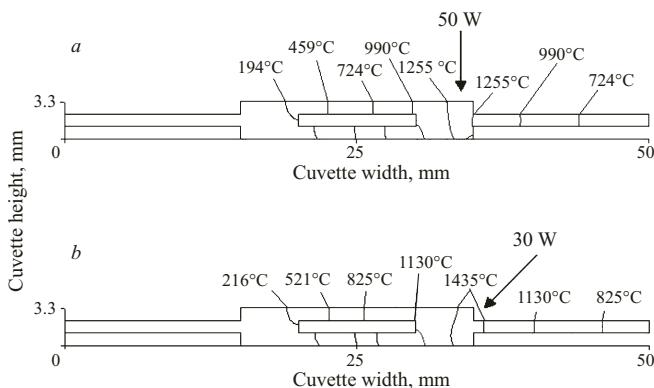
Temperature fields in a quartz plate for different types of welding: *a*) lap weld; *b*) T weld.
